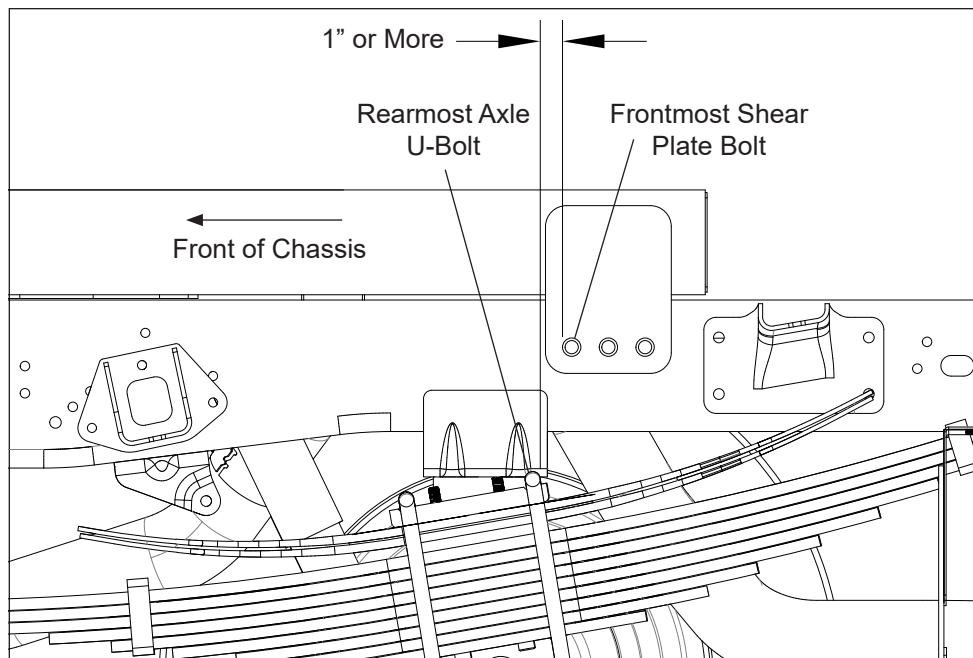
Shear Plate Bolts Located Behind Axle U-Bolts
